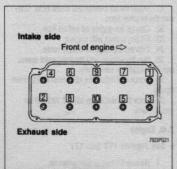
Cylinder head bolt removal sequence—2.4L (4G64) engine
